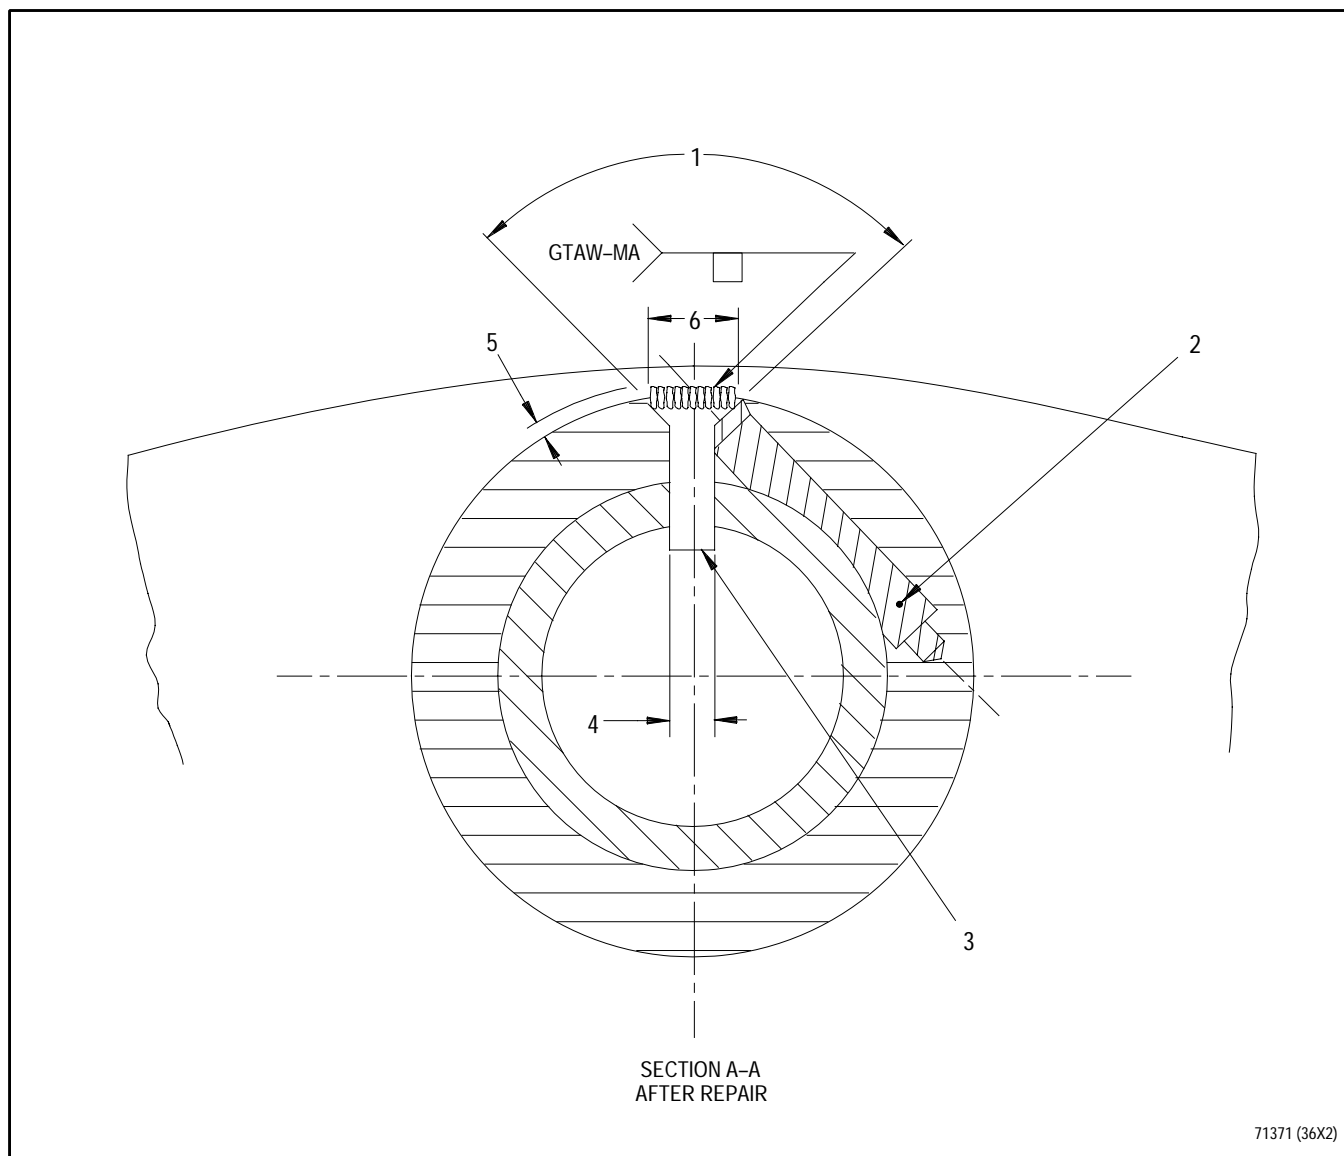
No. 4 Bearing Front Seal Support Assembly - Weld Repair (Sheet 3 of 4)
